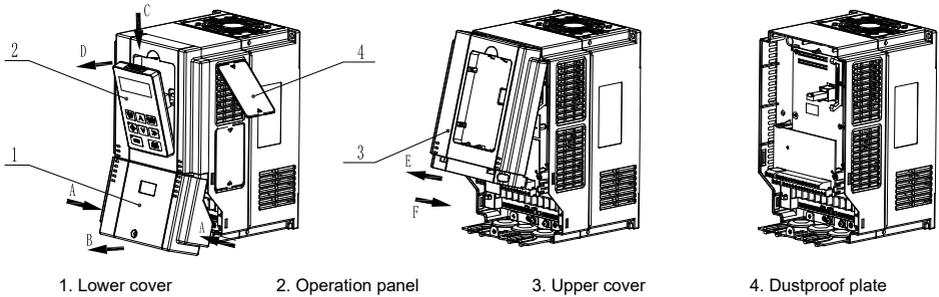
Removal and installation of drive components (taking R4 as an example)
